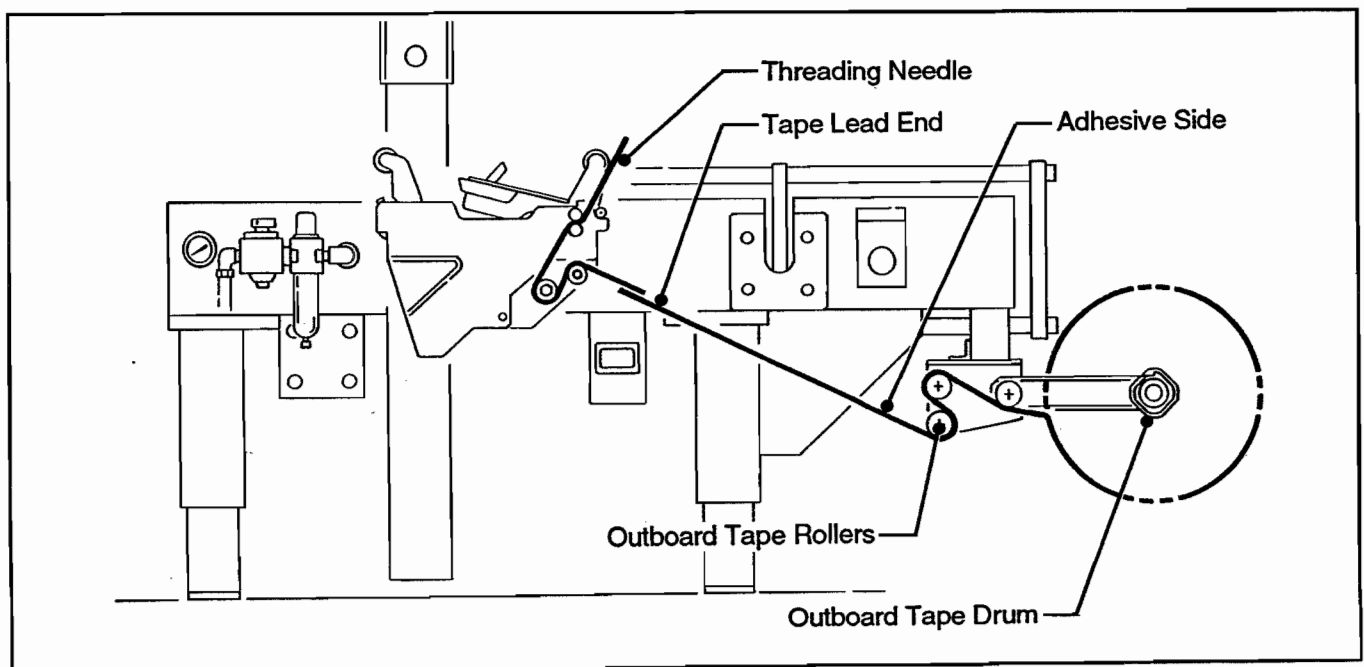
Tape Threading With Alternate Outboard Tape Drum
